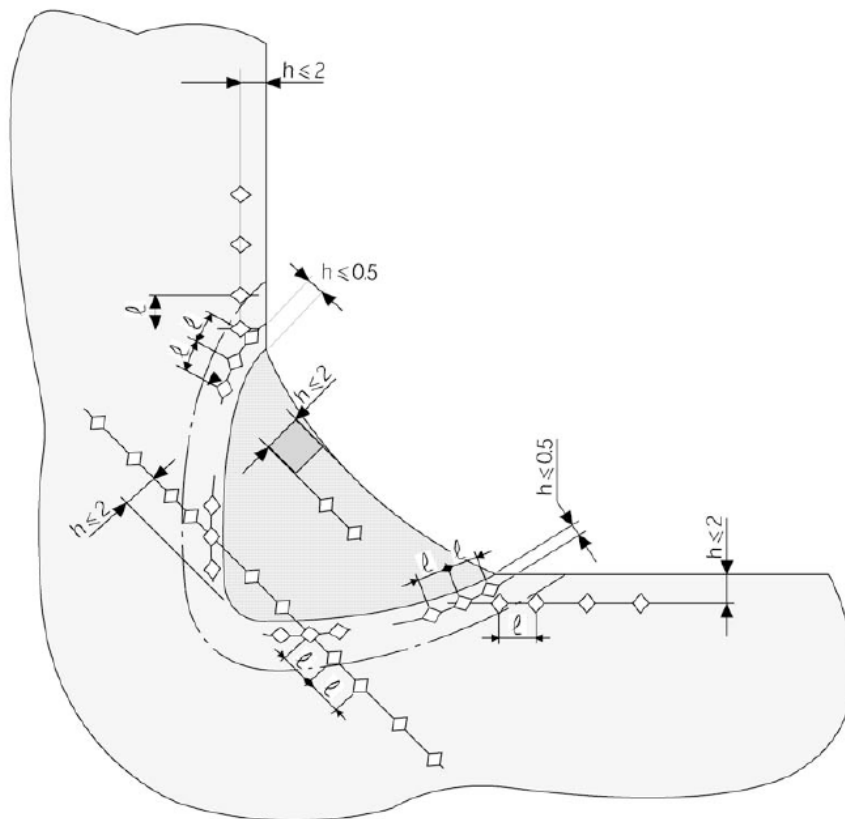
EXAMPLE SHOWING THE POSITION OF THE INDENTATIONS FOR HARDNESS TEST ON THE WELD METAL, THE HEAD AFFECTED ZONE AND THE BASE METAL OF T-joint WELD (DIMENSIONS IN mm)
